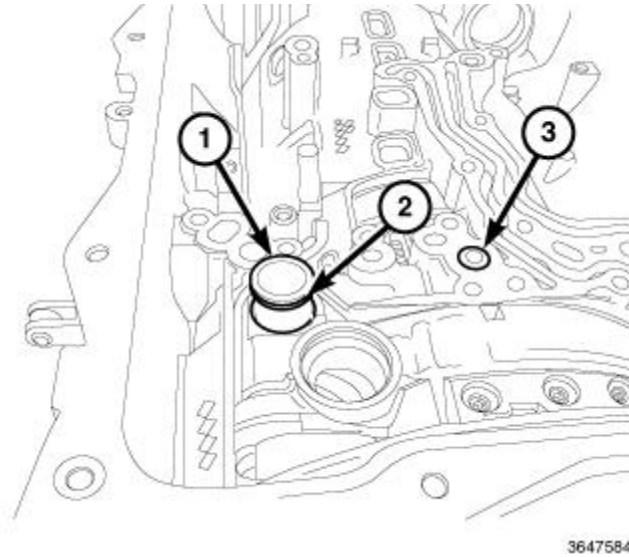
Fluid Port, Two O-Rings, Compression Seal
